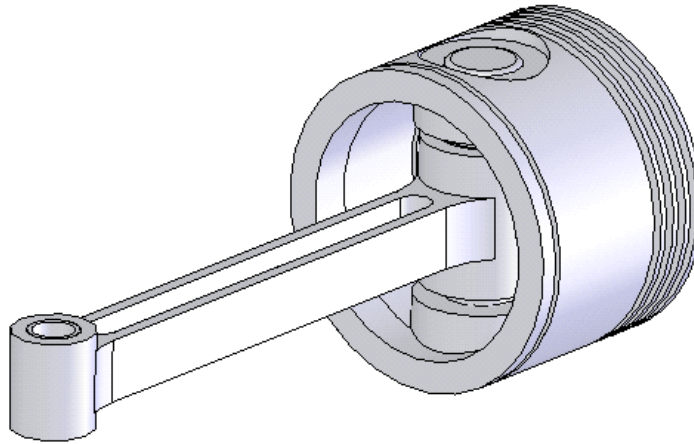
Assembly of Articulated Rod, Piston, Piston Pin, Piston Pin Plug, Rod Bush Upper, and Rod Bush Lower
